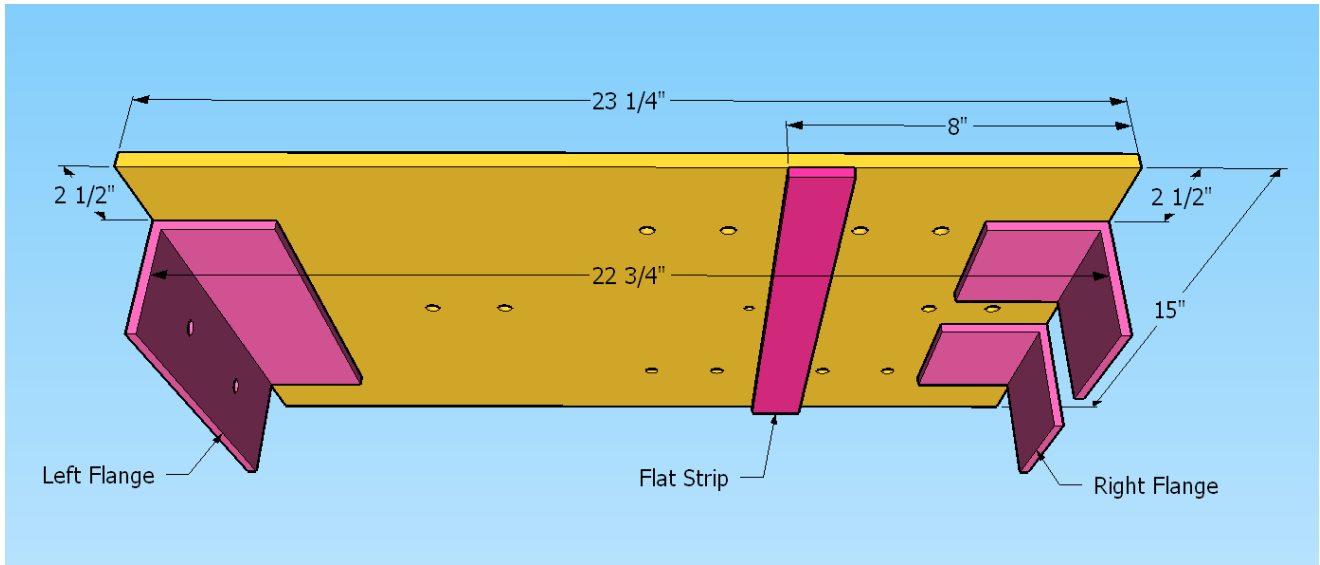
Base Plate Full View- Sample Holder of Rectangular Specimens.
